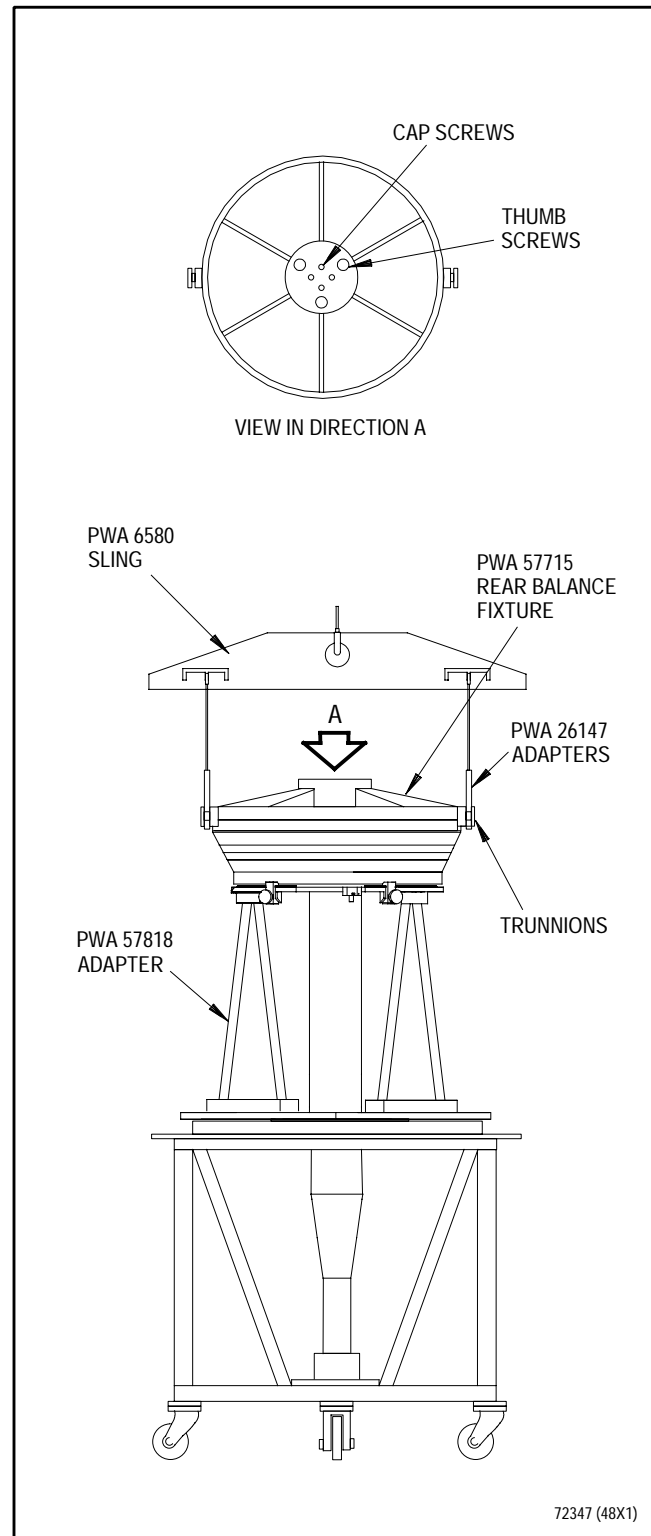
Front Compressor Drive Turbine Rotor and Stator Assembly - Balancing Tooling Removal (Sheet 4 of 6)
